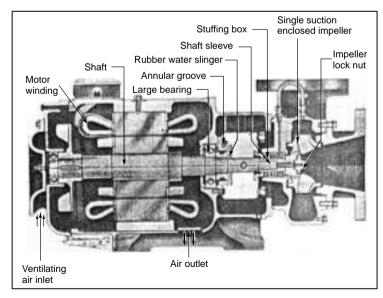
Sectional view of a motor driven monoblock horizontal volute centrifugal pump *Courtesy:* Worthington Simpson Pumps, Best & Co., Chennai
